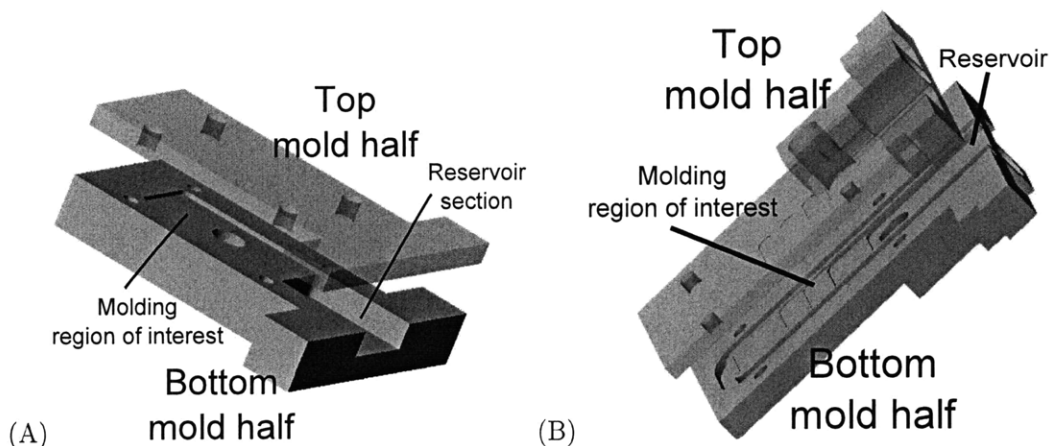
(A) Solid model version of two mold halves used for initial Thinky Mixer centrifugal casting. (B) Solid model version of two mold halves used for second version of Thinky Mixer centrifugal casting.
